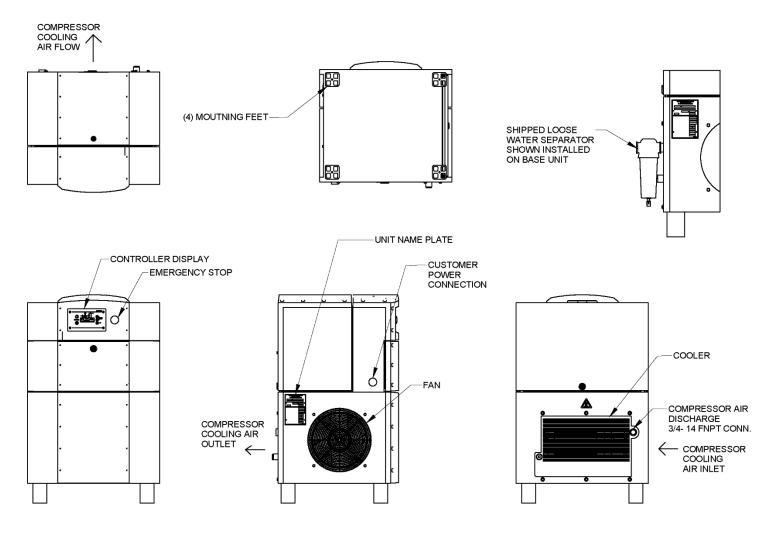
COMPRESSOR ILLUSTRATION, EXTERNAL DETAILS
